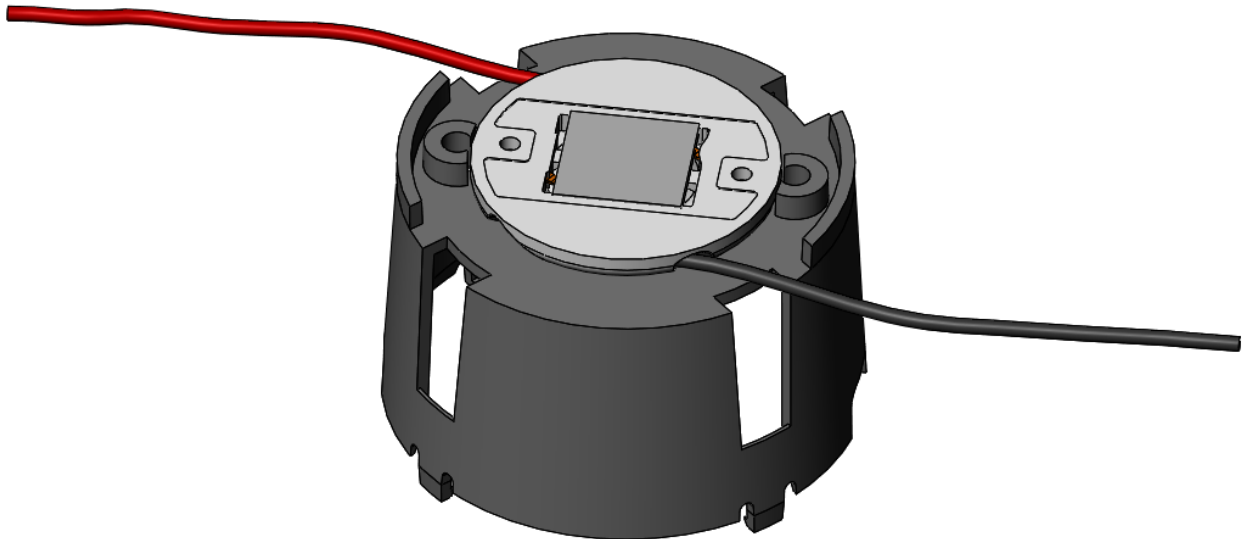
View from the bottom: the COB LED in the Electrical Connector, positioned inside the bottom of the Fraen Lens Holder (# FTS-FNL50H-A_ shown).
